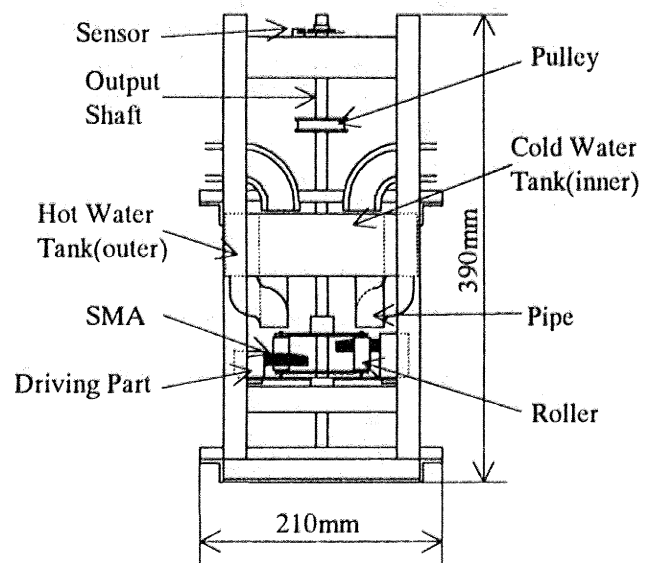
Schematic Illustration of SMA Heat Engine(Front View)
